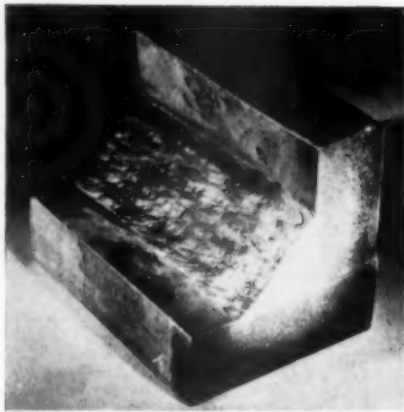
16 pass weld in 1 1/4 inch plate made by Fleet-Fillet method.
